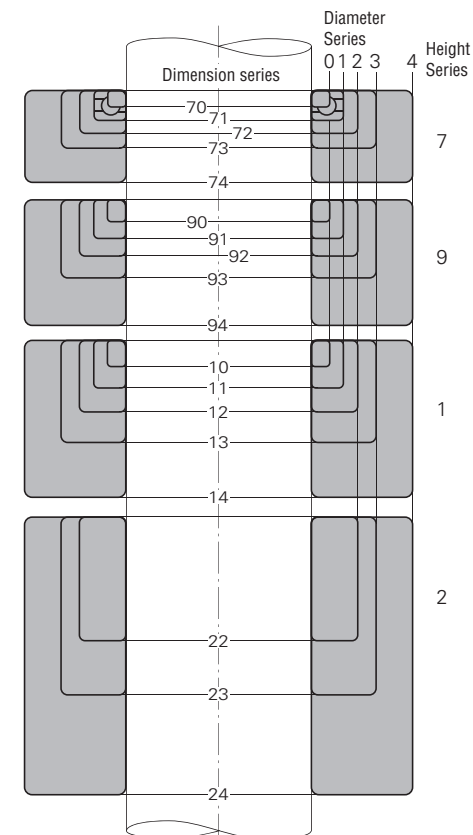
Single-Direction Thrust Ball Bearings
